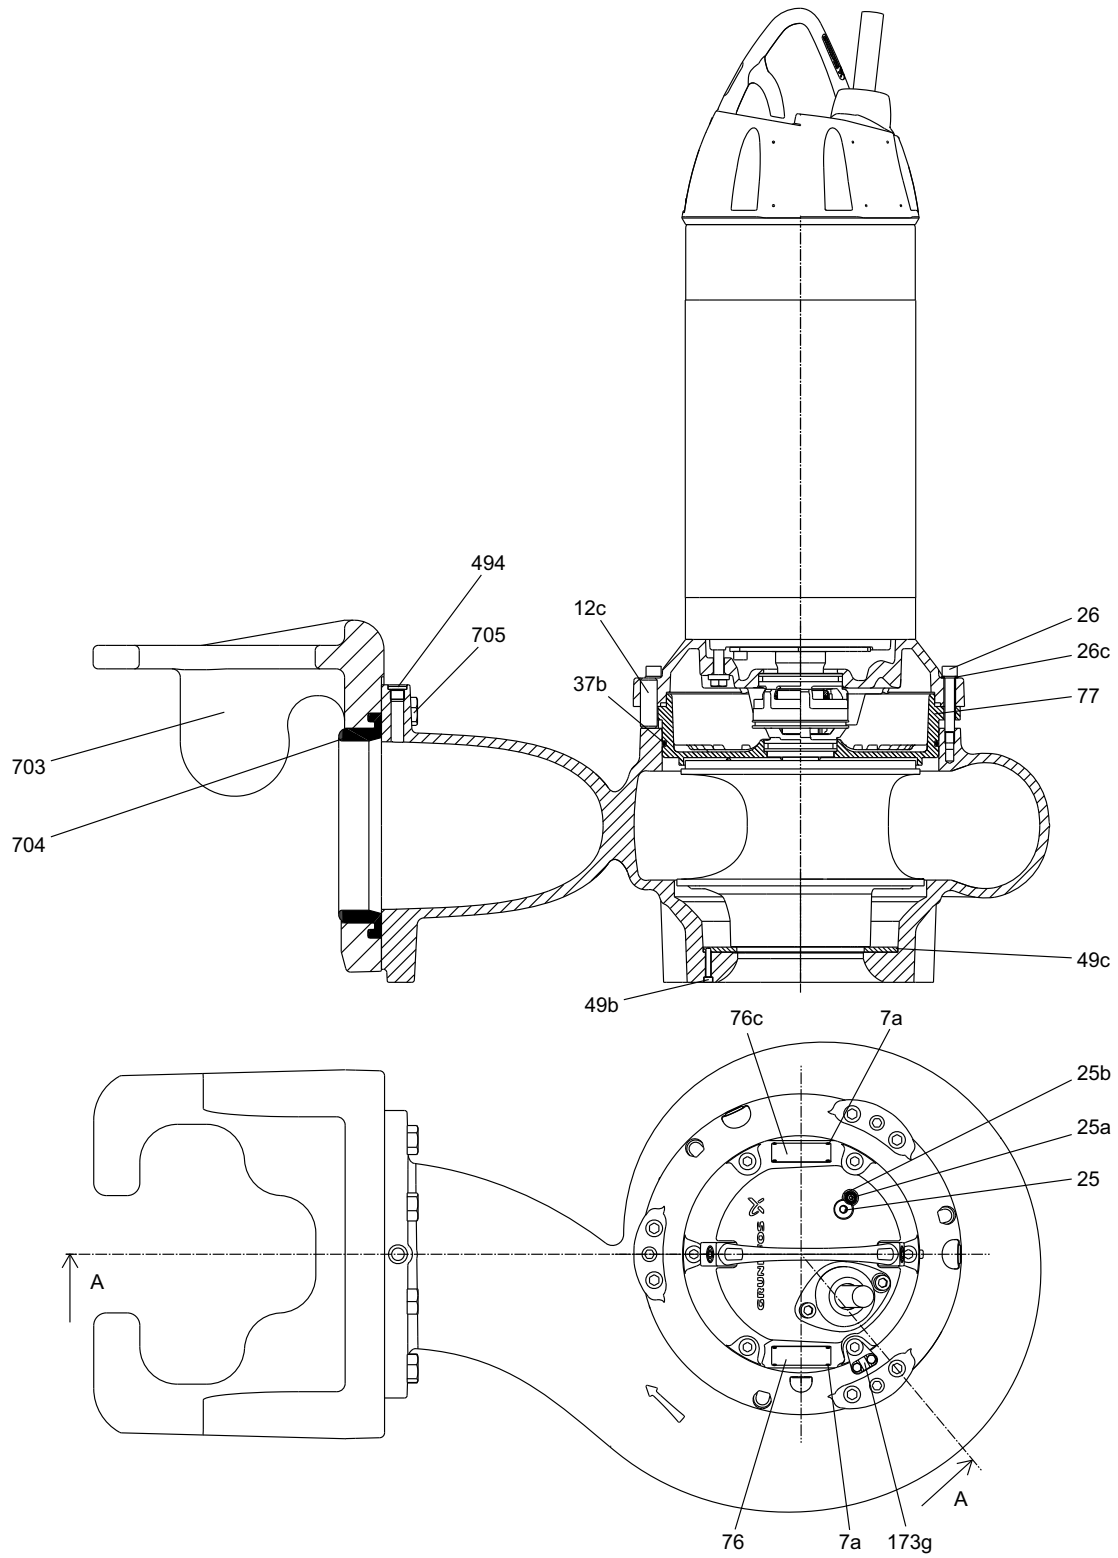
Sectional drawing, SL pump with guide claw, 2-4 poles
